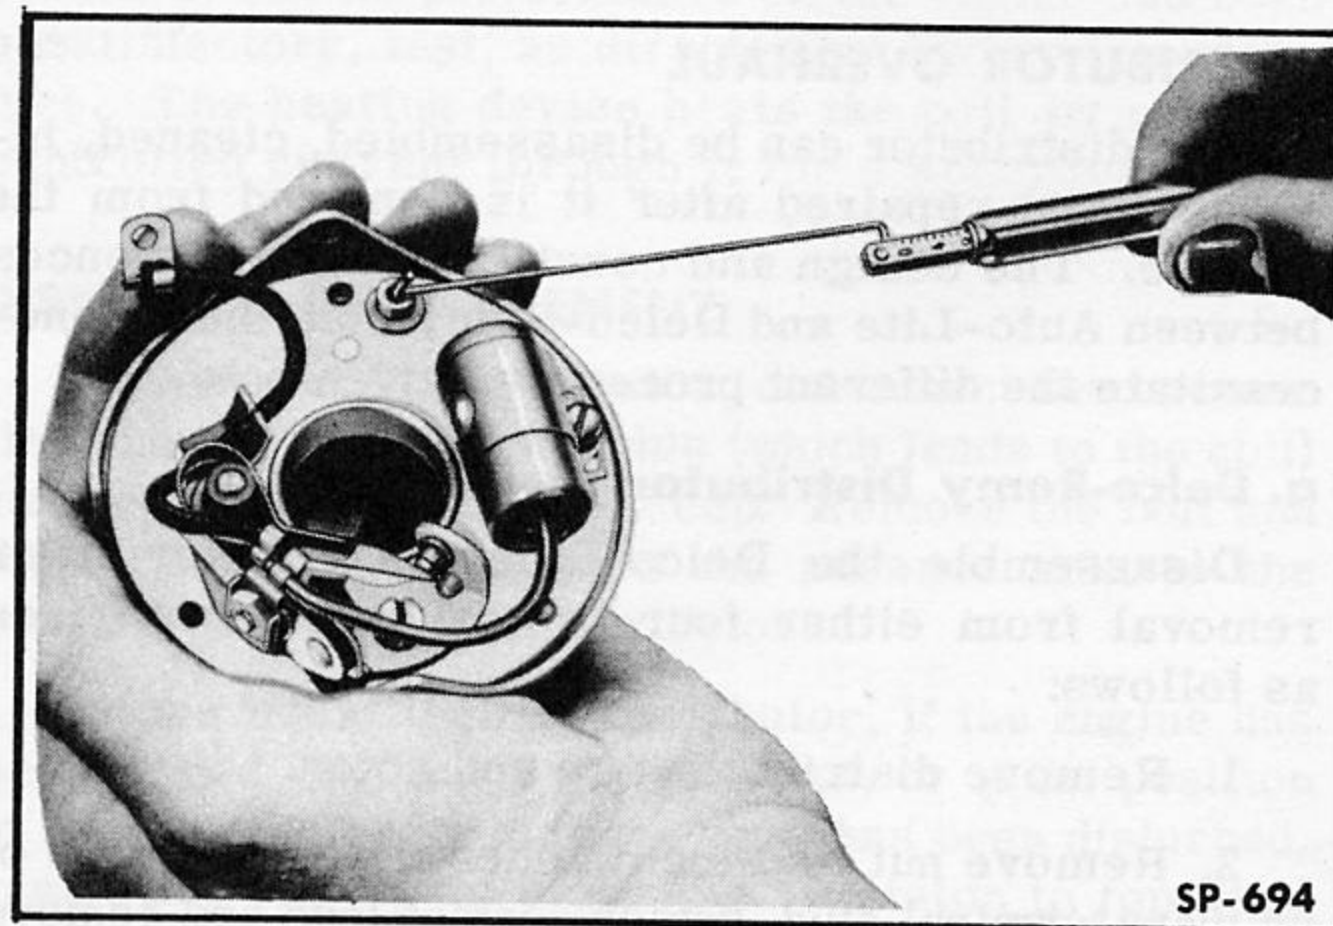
Checking Delco-Remy Distributor Breaker Plate Drag
